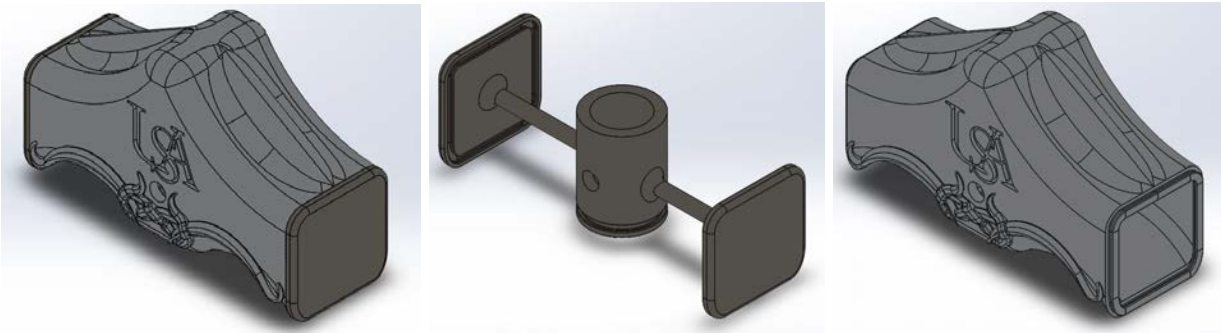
Final design of *Mjölfnir* in SolidWorks.
